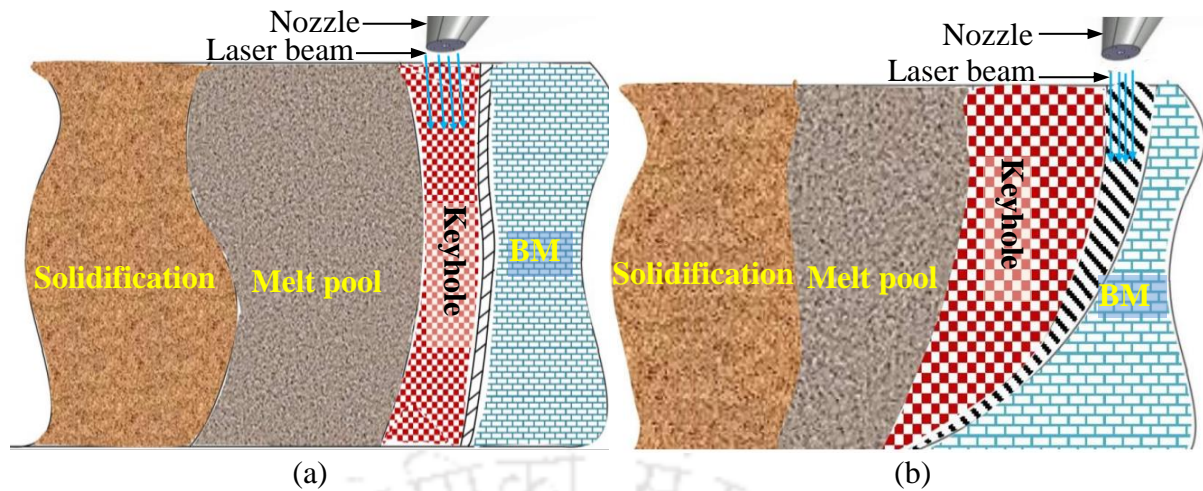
Schematic diagram of different keyhole modes of welding (a) open and (b) blind keyhole
